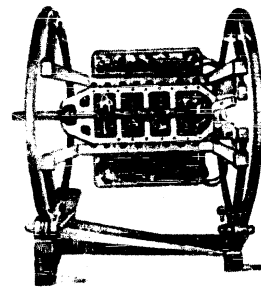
Machine for Assembly of Engines Enabling Turning of Engine During Assembly
